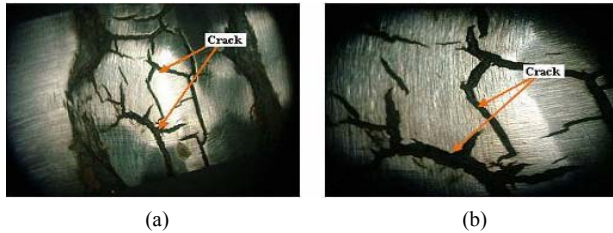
Magnified view of the surface crack obtained in the failed weld tube.
